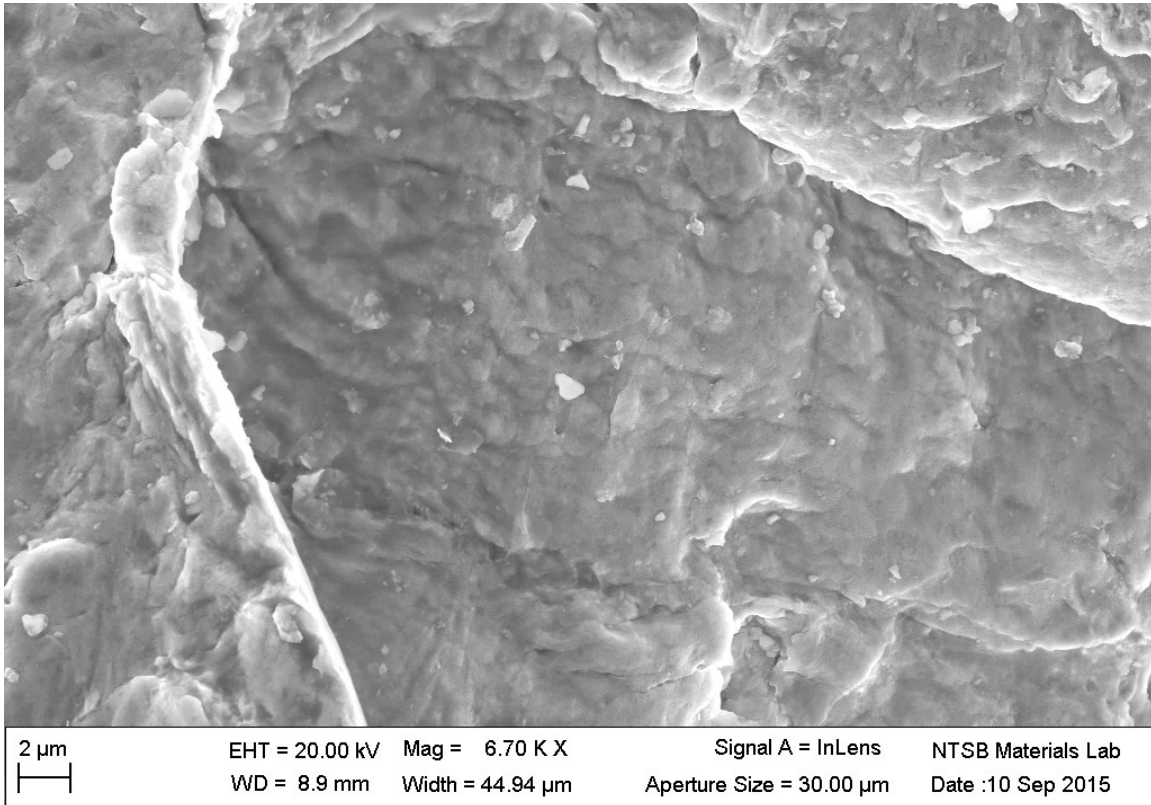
SE micrograph of fatigue striations in the thumbnail crack portions of the #2 connecting rod fracture surface.
